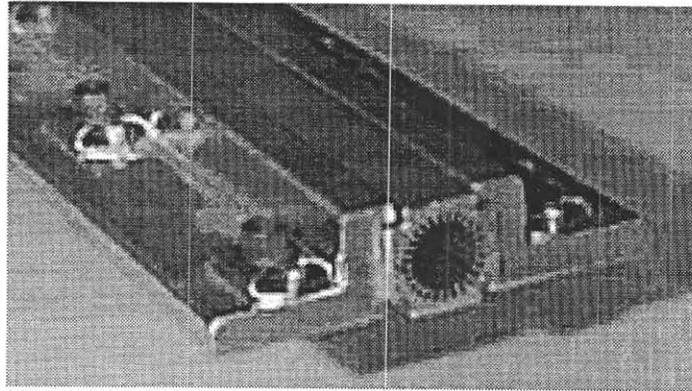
Heat Pipe & Heat Pipe Clamp Assembly.
